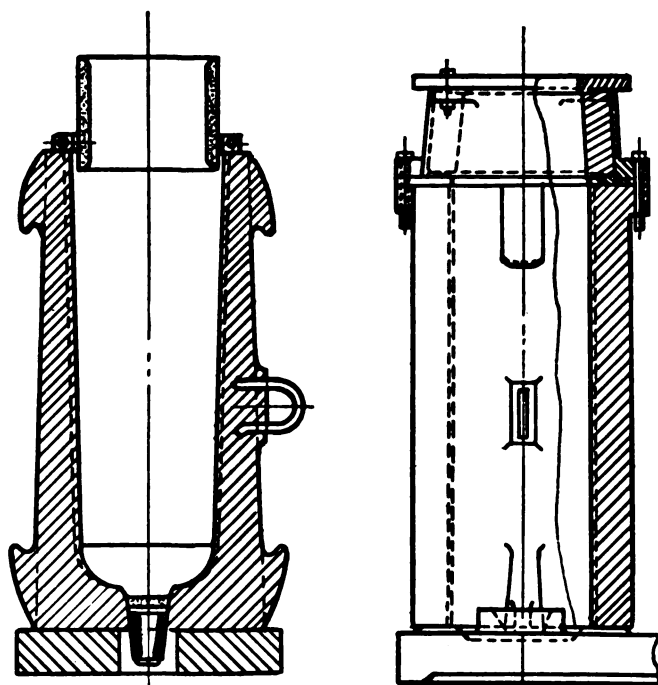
(left) Gathmann hot-top mold; (right) Valley small-taper mold.
